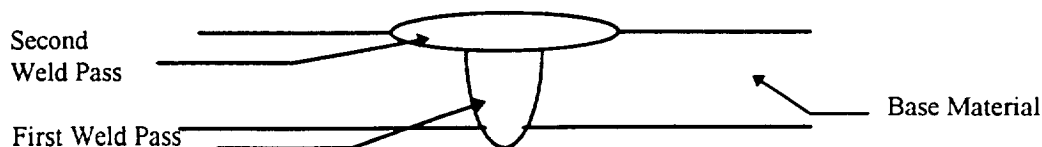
Cross-sectional View of Weld Bead, Showing Two-Pass Weld
